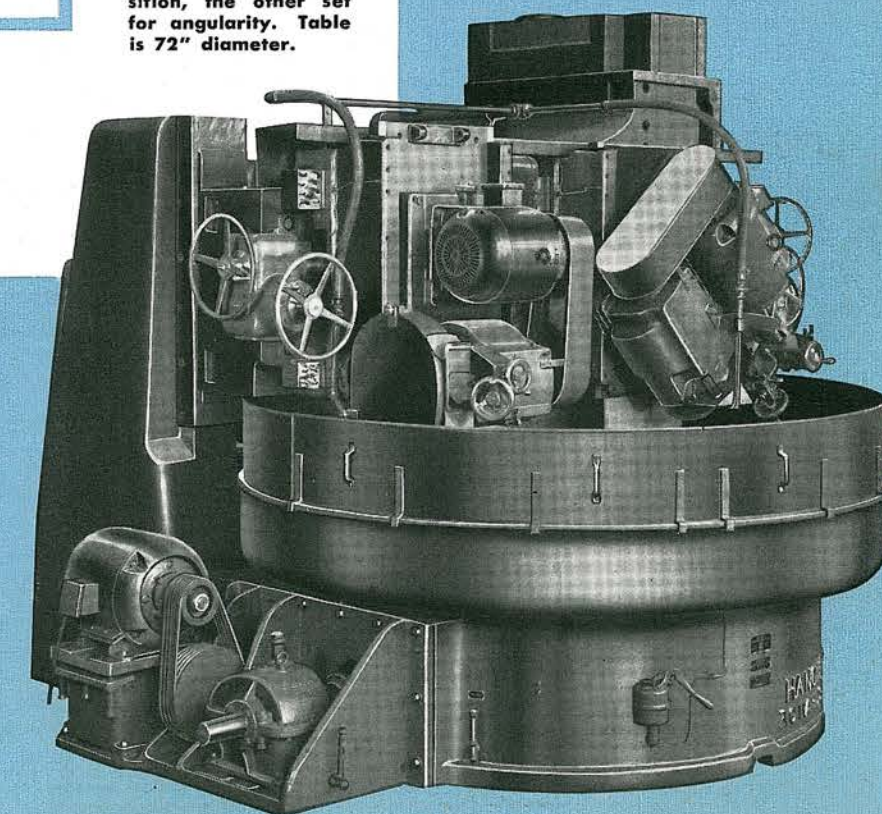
Frontal view of Rotary Plano with two grinding heads — one in horizontal position, the other set for angularity. Table is 72" diameter.
